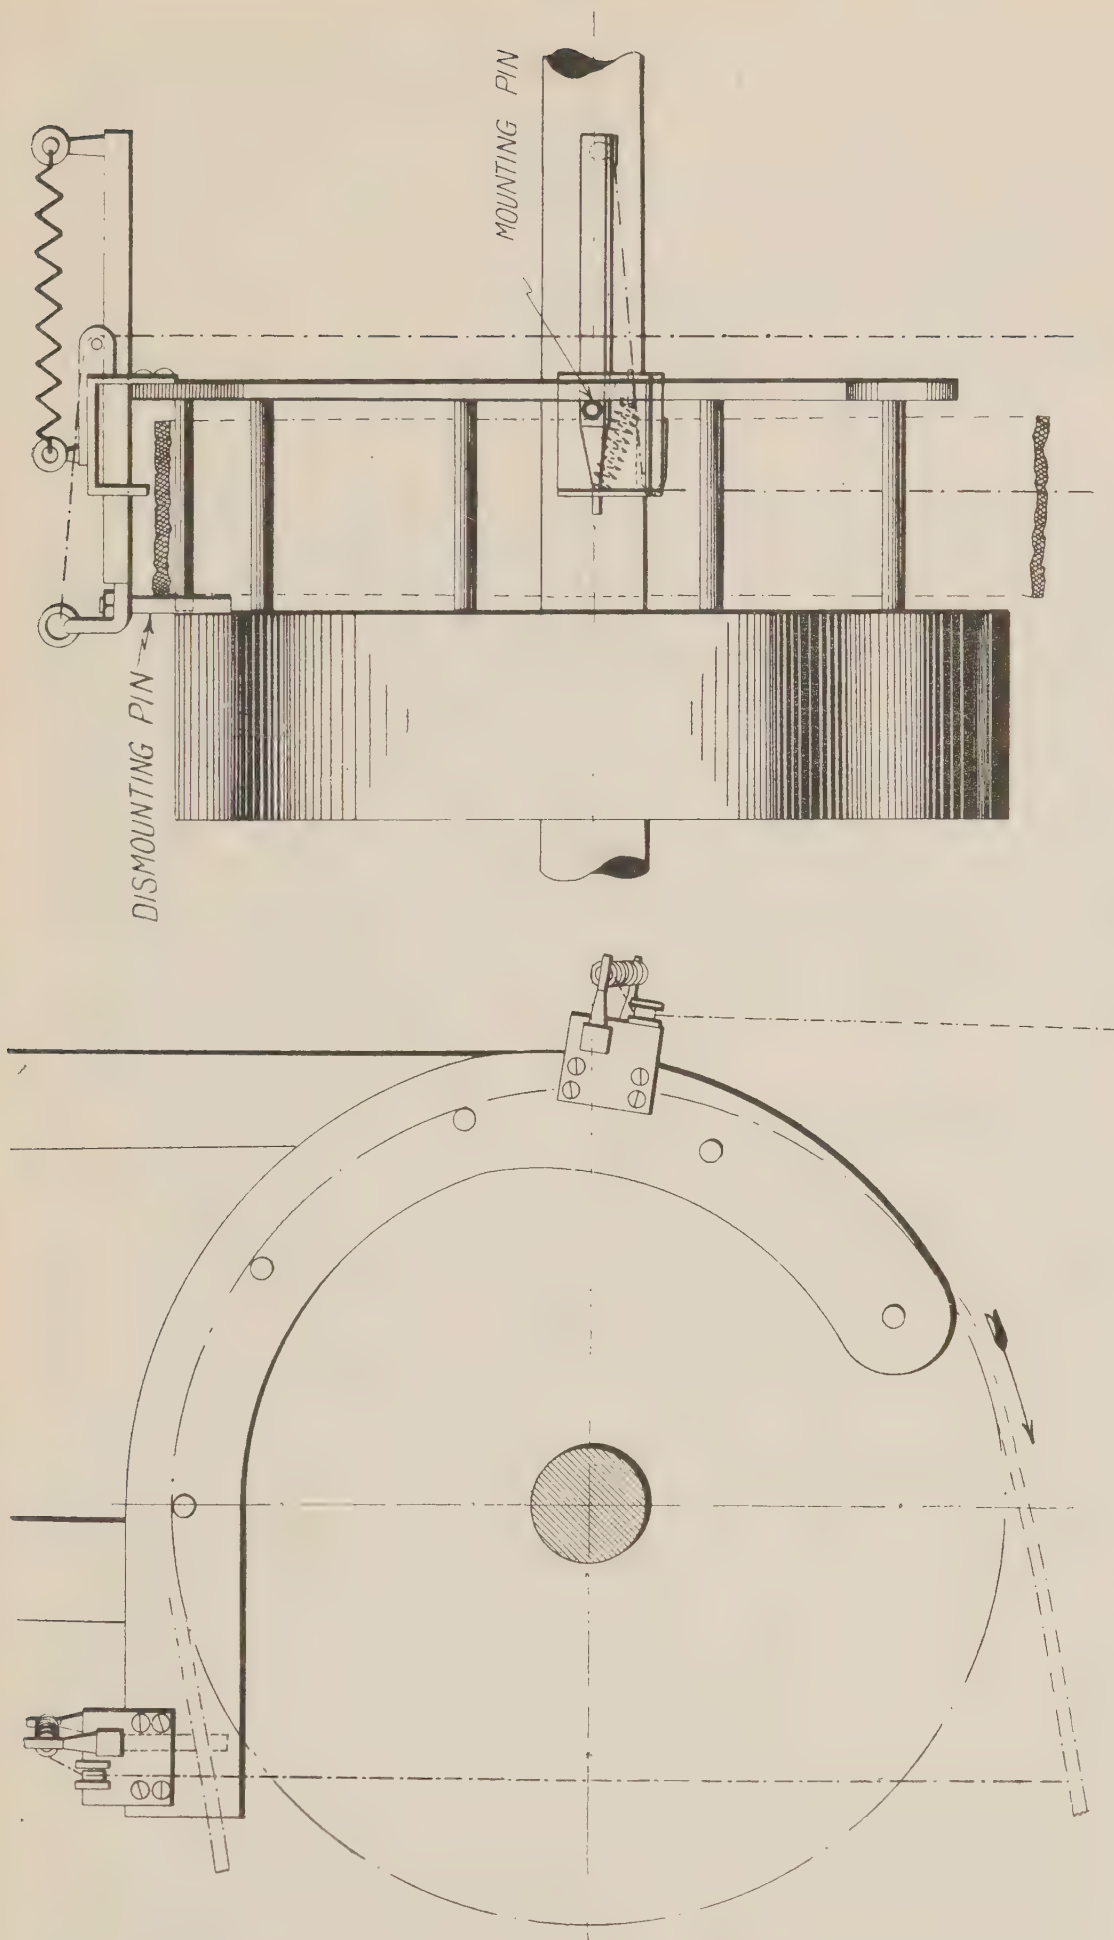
BELT MOUNTER WITH SPRING-CONTROLLED MOUNTING FINGER.
